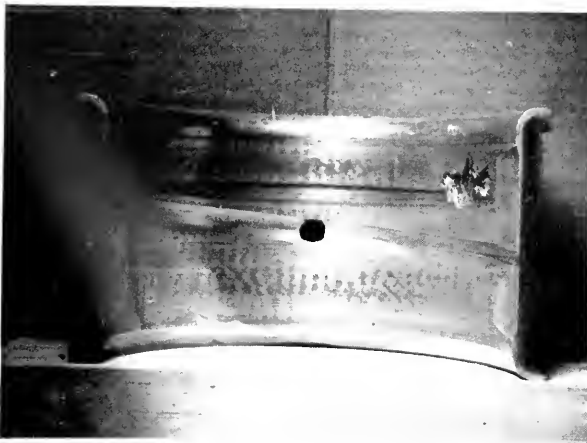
Cracked bearing showing grooving and pattern of shaft vibration. Upper part unfit for fluid lubrication.
